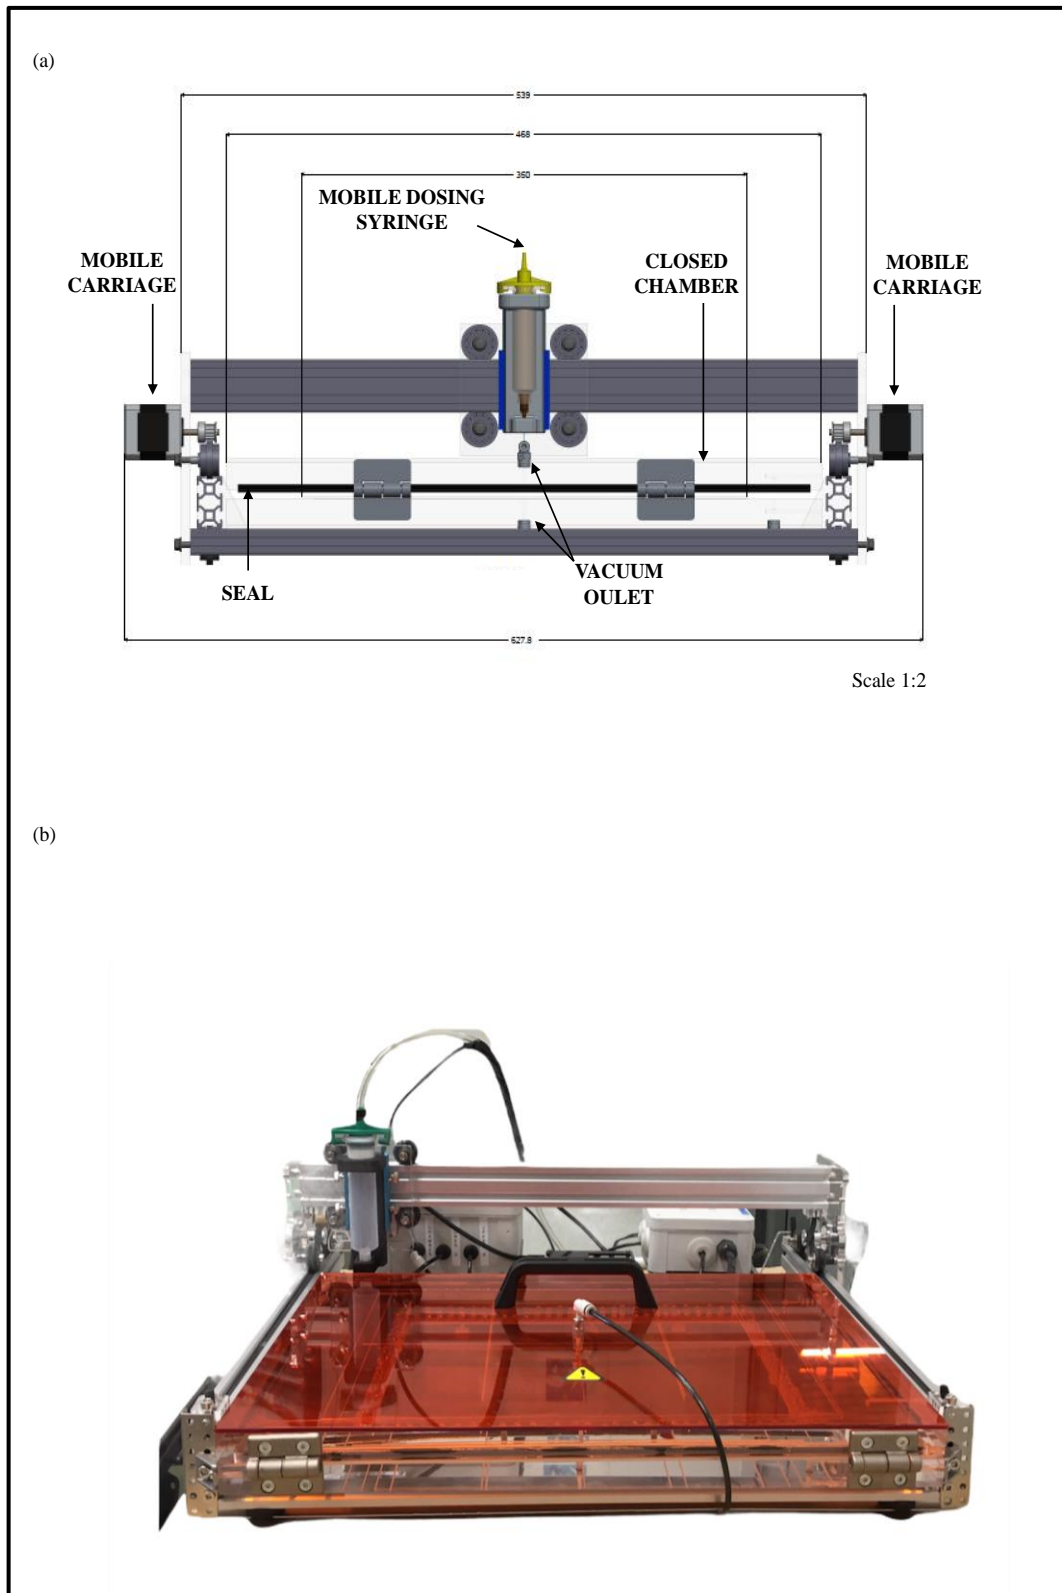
a) The frontal view of the rendering and b) the real view of the Glue Dispensing-Assembling system. The dimensions of the system in the design table are expressed in millimeters on a scale of 1:2.
